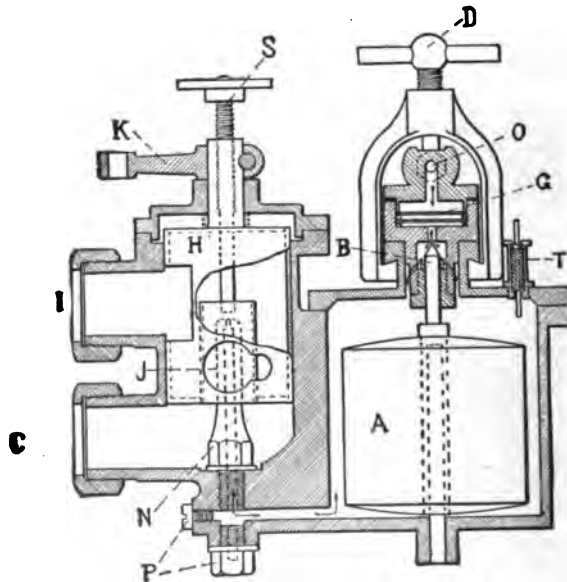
Section through a typical Float-Feed Carburetter. This particular device is the one shown in the previous cut. Here A is the hollow cylindrical float; B, the spindle of the needle valve; C, tube for admitting hot air around base of spraying nozzle; D, adjusting screw for the needle valve; H, adjustable air valve; I, outlet for fuel mixture to cylinder; J, adjustable opening for air; K, arm for attaching throttling lever; N, spraying nozzle; O, P, screw caps on channel from float chamber; S, adjusting screw for regulating gasoline spray; T, air vent; G, filtering gauze.
